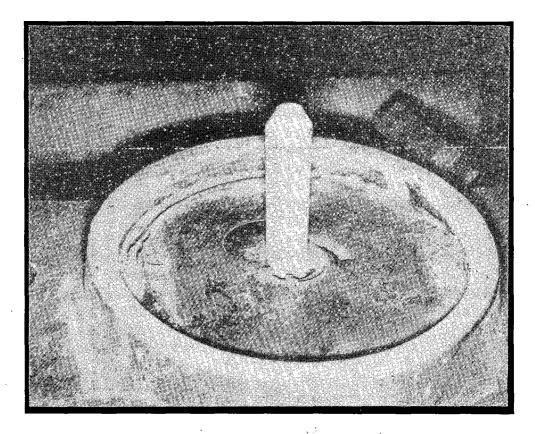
Fuel Car Truck Center Pin and Bowl
